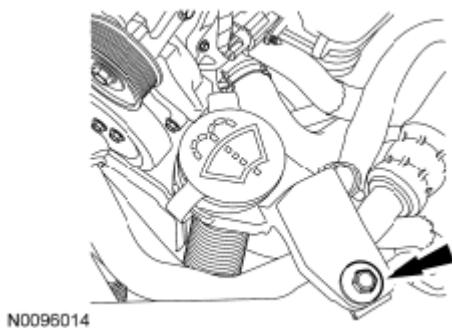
Locating A/C Tube/Windshield Washer Reservoir Bracket Bolt
